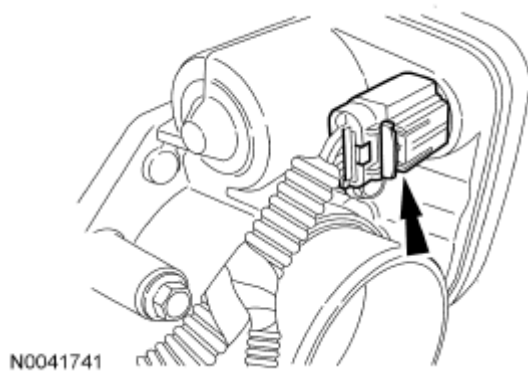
Locating Electronic Throttle Body Electrical Connector
